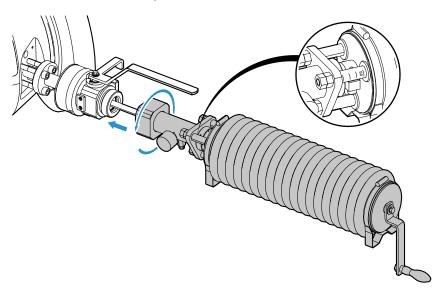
Mounting the spindle assembly to the ball valve assembly
